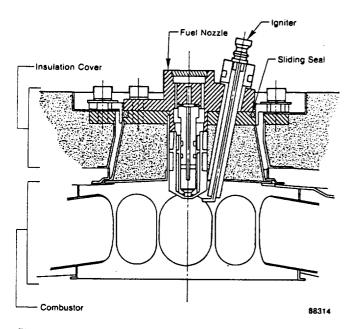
Alternative Support and Seal for 3-Hole Conical Nozzle and Igniter in Mod II CGR Combustor
